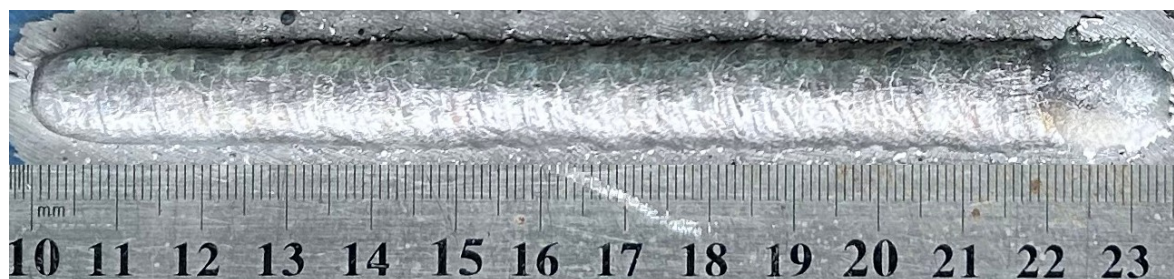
External appearance of the welding bead produced in the following mode:
